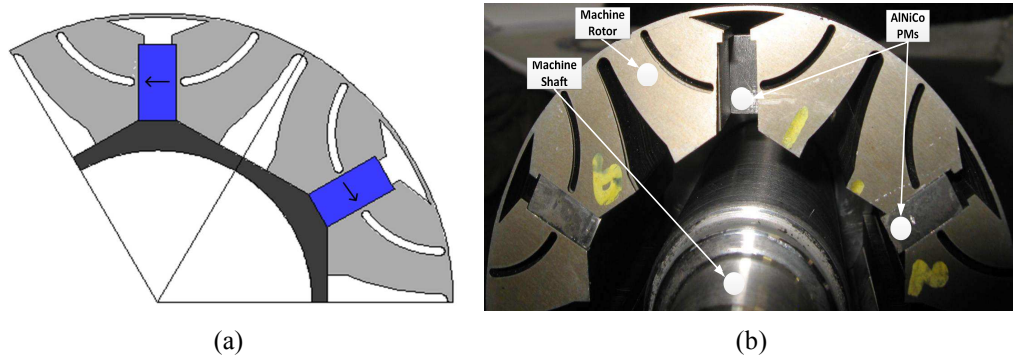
Rotor geometry of the variable flux machine, (a) and the prototyped rotor, (b)
